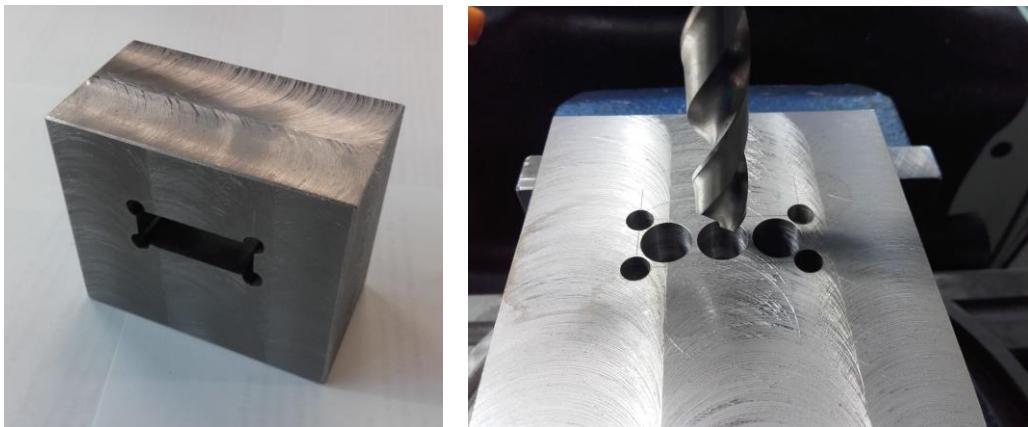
Photos of finished counterweight (left) and work in process on the mill (right)
